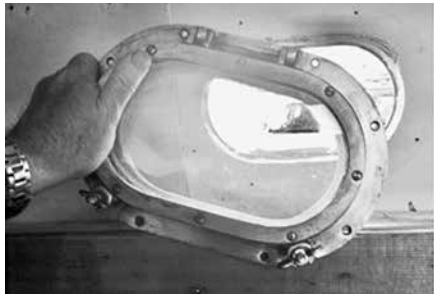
Porthole exterior surrounds and internal porthlights were reinstalled.
